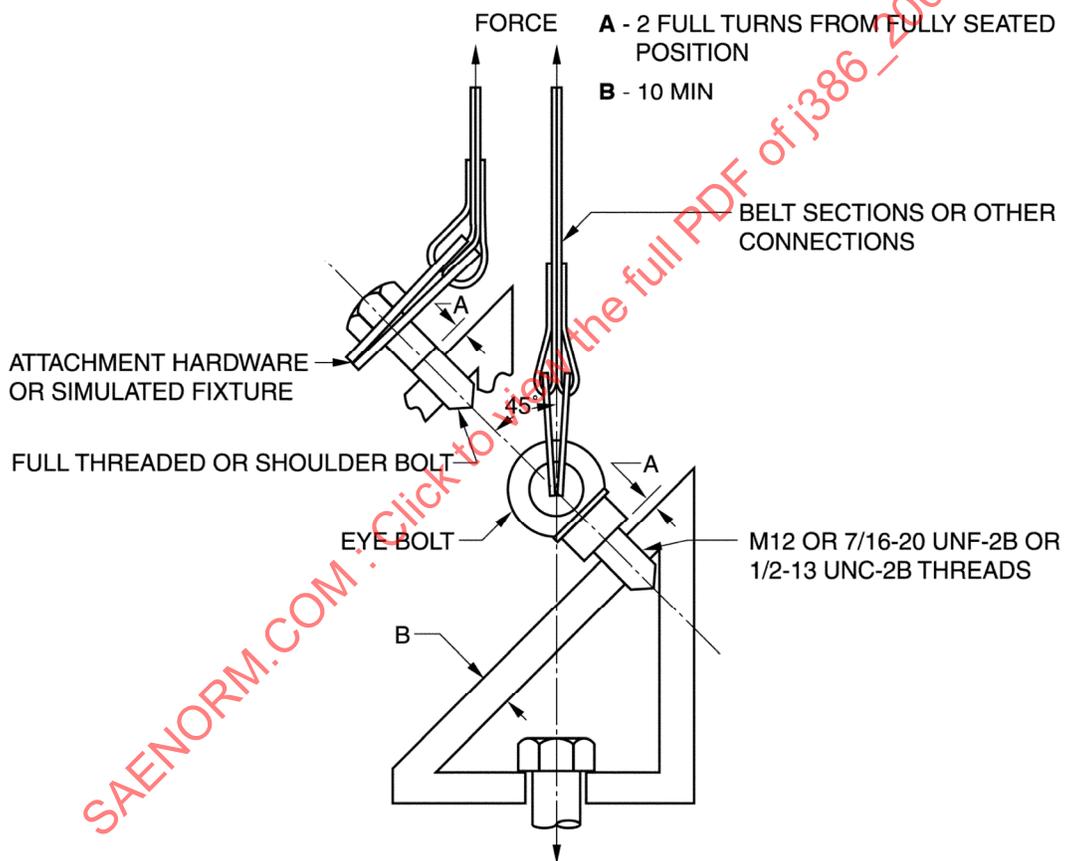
ATTACHING BOLTS TEST FIXTURE
